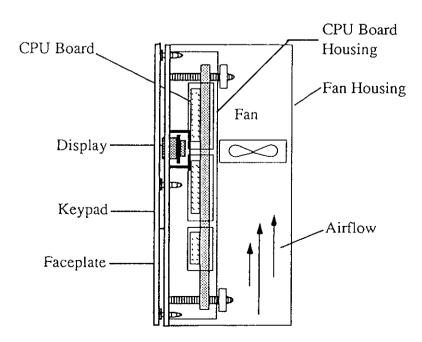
EPC-2000 Processor Assembly Cross-Section
